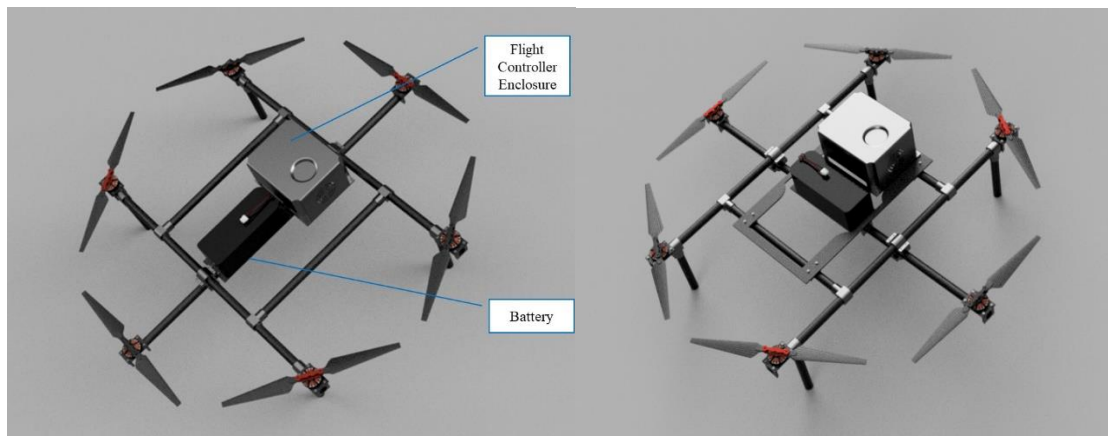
CAD Images of Hexacopter: a) Design 1 b) Design 2
